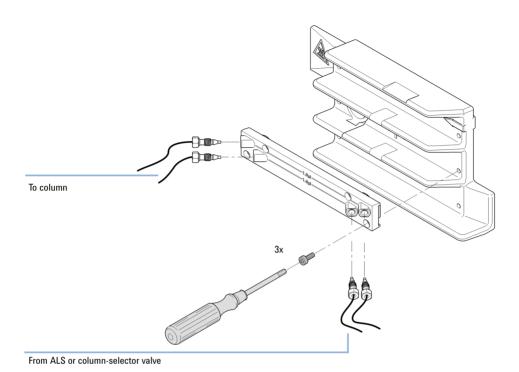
Fixing Heating or Cooling Devices (G1316C)
